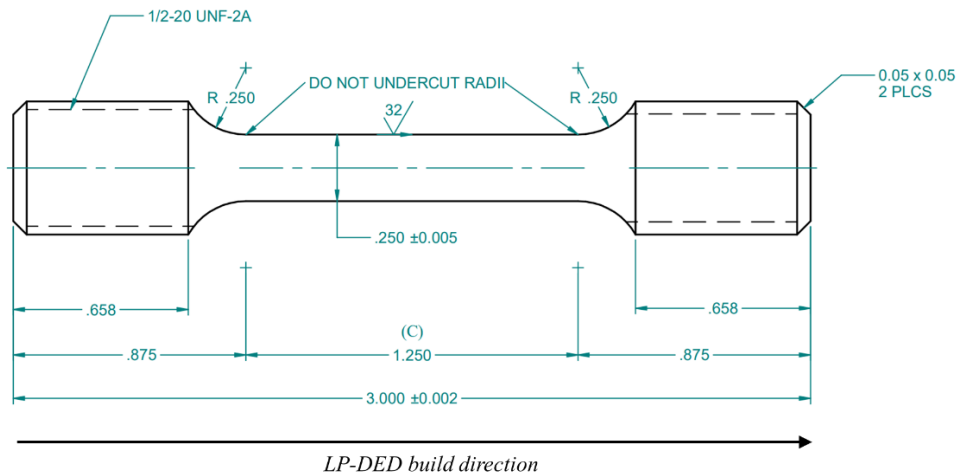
Geometry and dimensions of the smooth tensile specimen used for testing in ambient air and in 5 ksi gaseous hydrogen at ambient temperature. All dimensions are in inches. For specimens tested in hydrogen, the specified surface finish (Ra) on the gauge section is 32 μin or better. Low-stress grinding (LSG) was used to achieve the required surface finish.
